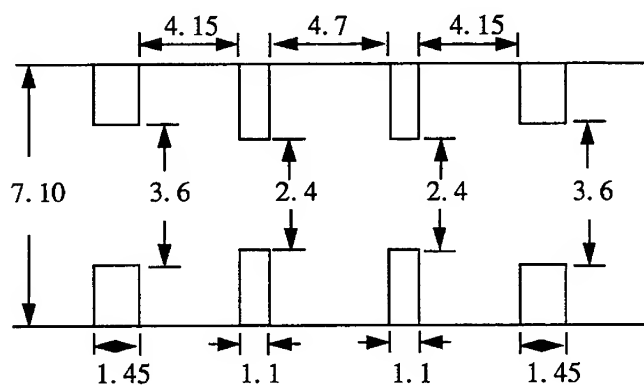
Filter Geometry with Design Dimensions (in mms)
